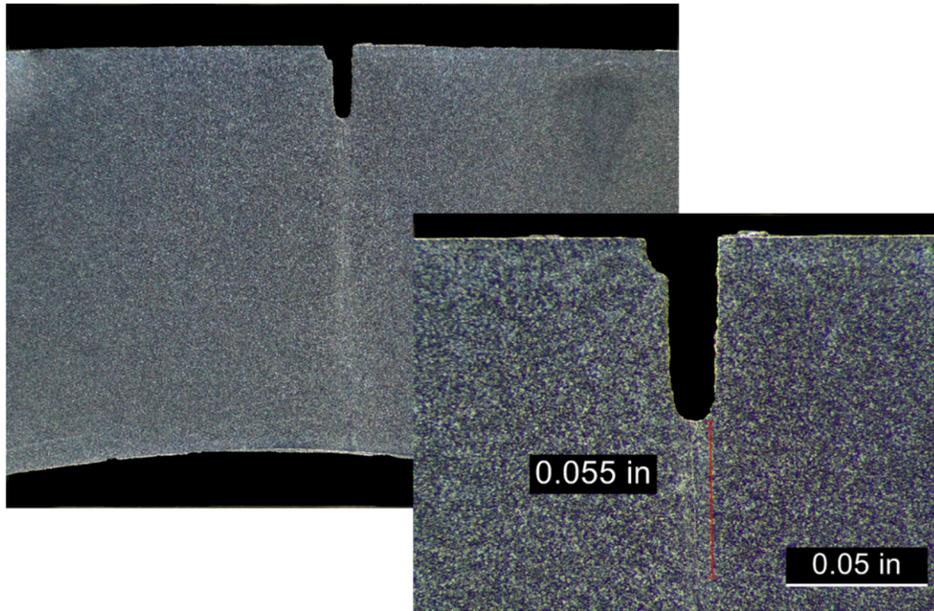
Transverse post-test sectional view of the EDM Notch C with crack
